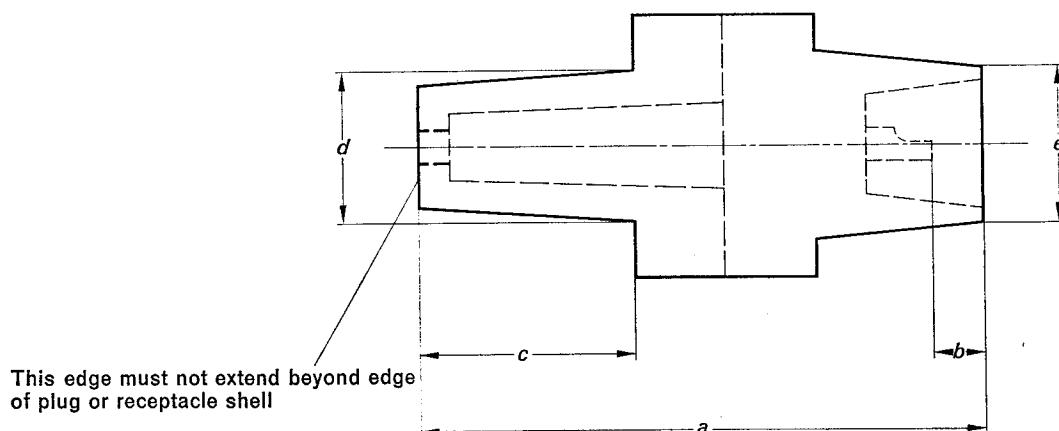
Socket insert for connector with arrangement 18-16.
